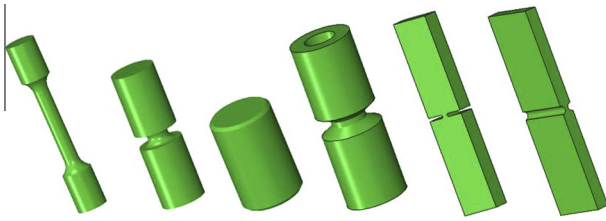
Sketches of a smooth round bar, a notched round bar, a compression specimen, a torsion specimen, a flat notched tensile specimen, and a flat grooved plane strain specimen.
